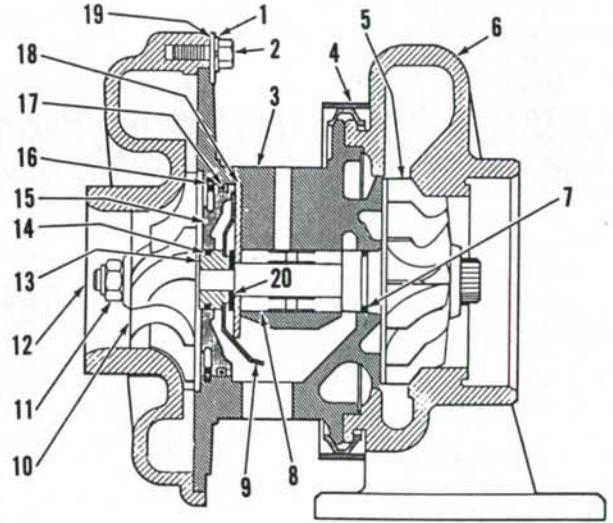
Sectional view of Schwitzer turbocharger showing component parts and their relative positions.
